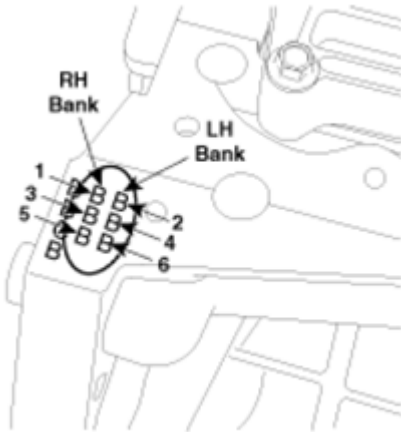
Identifying Cylinder Bore Size Code On Cylinder Block
